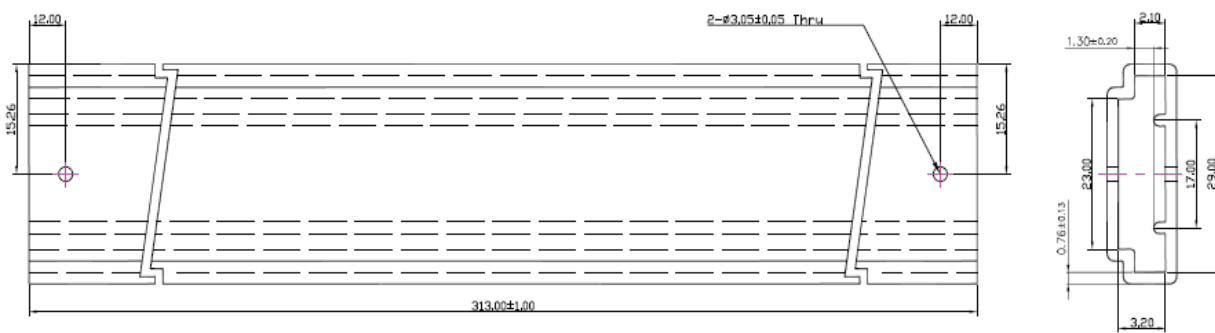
Tube dimensions for L2C5-xxxx1211x19Px.
